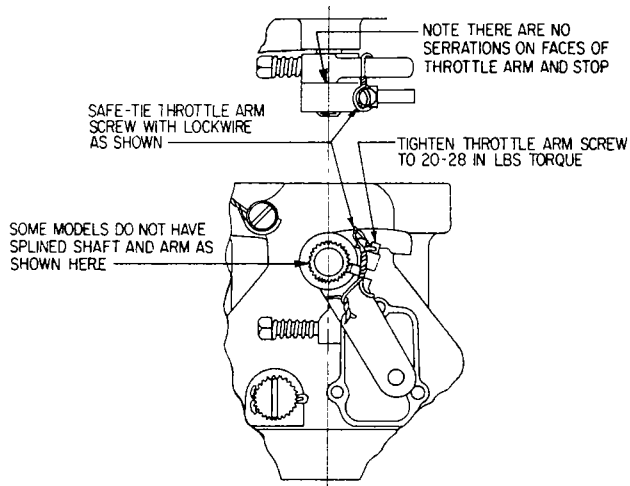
Previous Throttle Arm Configuration Showing Clamping Screw and Lockwire
